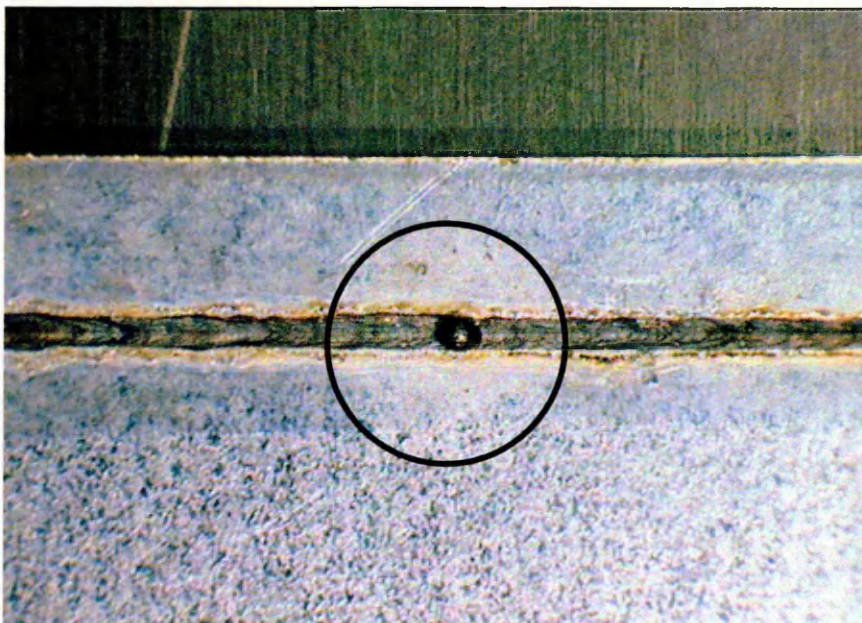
Weld bead surface porosity in a 1.2mm V1437 (top) – 1mm 2205 laser welded lap joint
